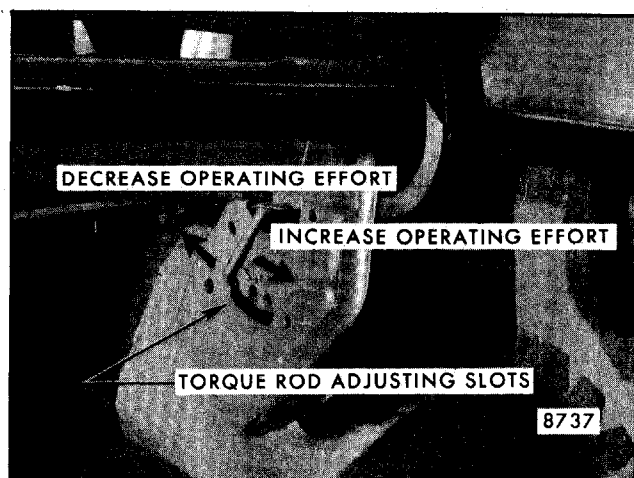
Right Side Torque Rod with Trim Removed - Cadillac "K" Style
